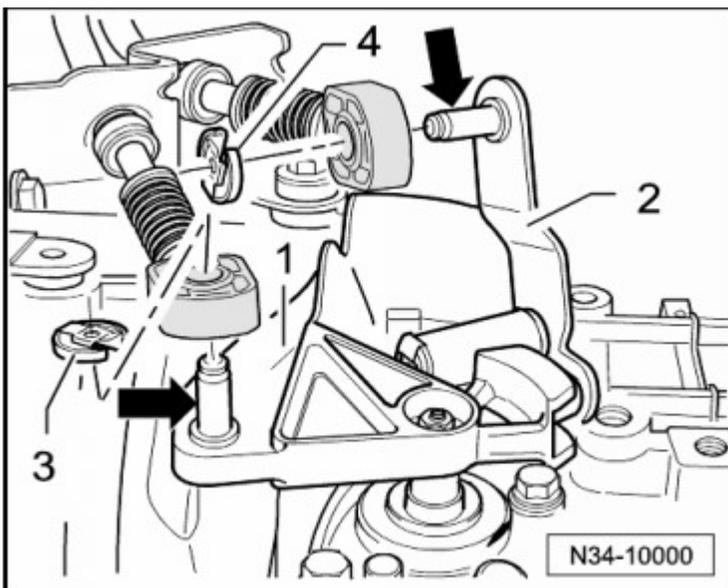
Identifying Shift Cable Lock Washer To Transmission Shift Lever, Cable And Pins
